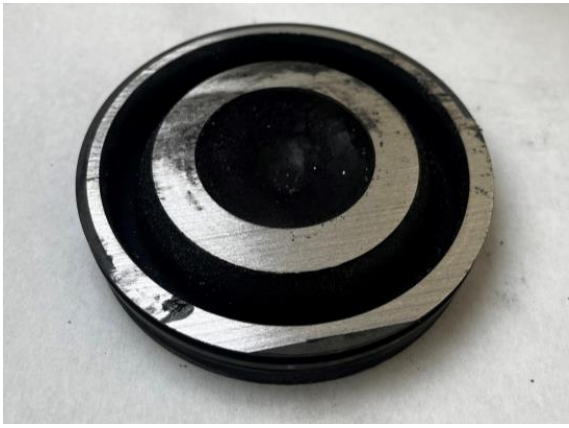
Cross sectional view of piston 13 top part of cooling gallery after cleaning.
